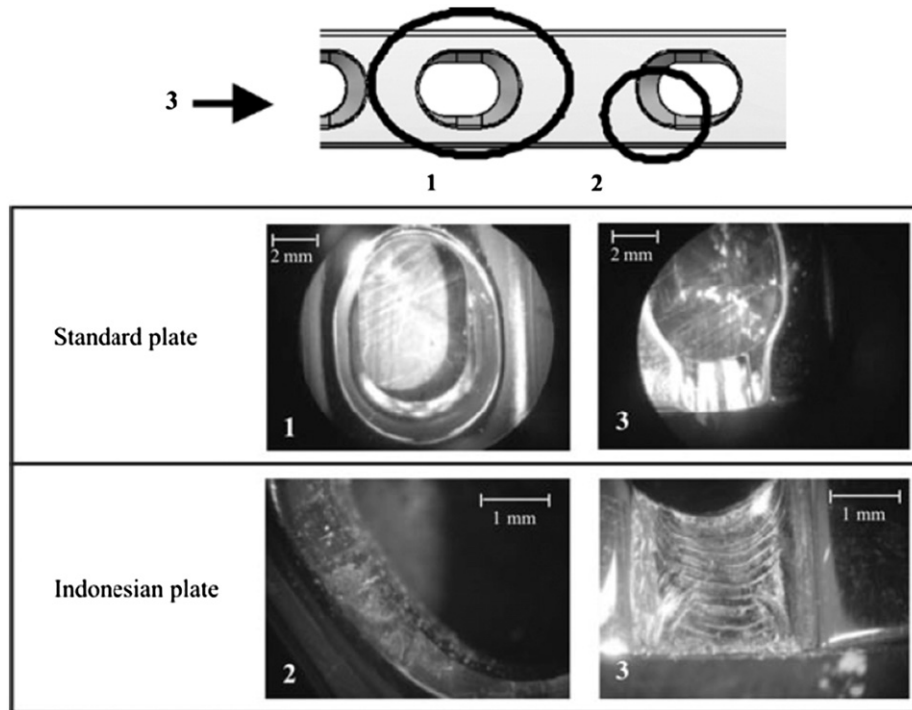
Photographs of the plate holes viewed from above showing typical surface defects visible on an Indonesian Narrow DCP (Manufacturer D) as compared to the standard plate. The location of the pictures is presented above.
